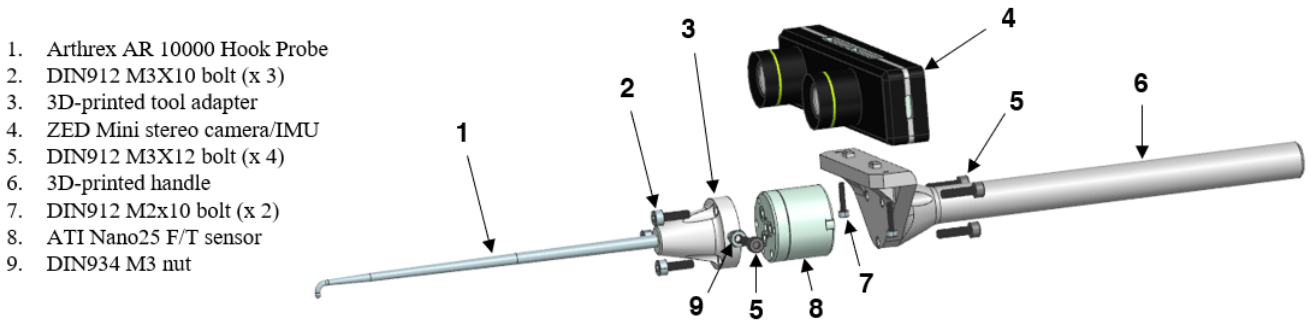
Exploded view of arthroscopic tracker assembly, with bill of materials and components.
